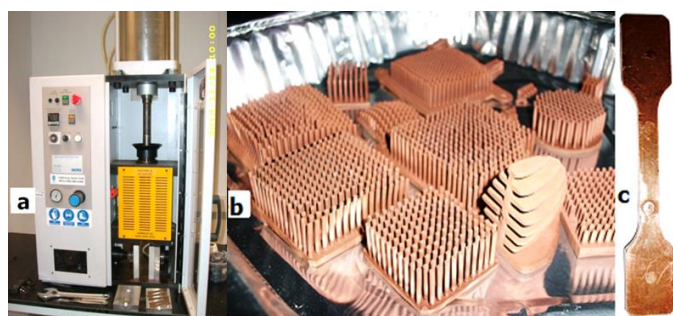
VIM machine (MCP-100KSA) was used to produce green samples of Cu/MWCNTs, (b) heat sink molded samples, and (c) dog bone molded samples.
